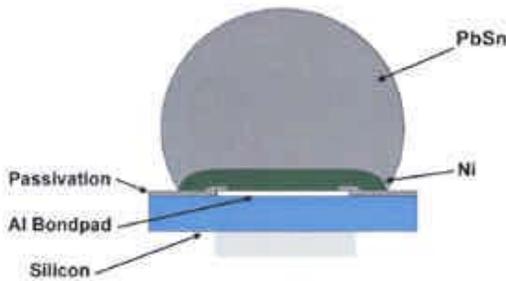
Scheme of a solder bump with Ni UBM (IZM Berlin).
